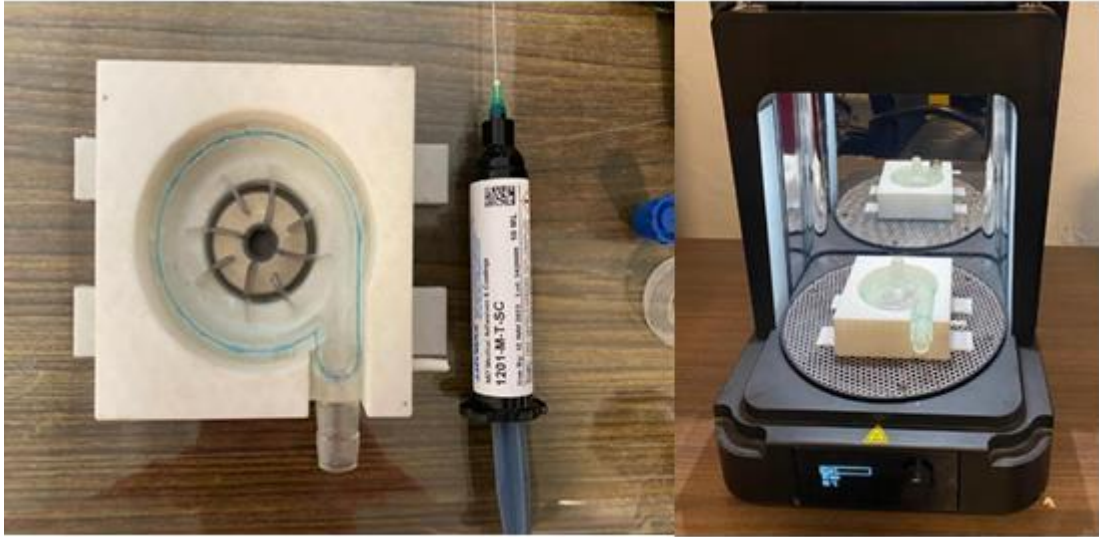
Glue added to clear 3D printed pump and cured in UV chamber
